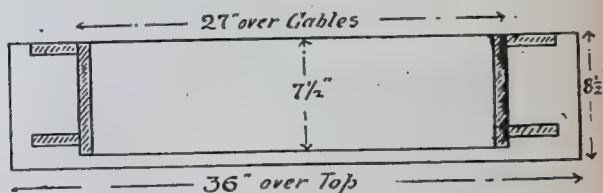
PLAN SHOWING TOP, GABLES AND BRACKETS.
